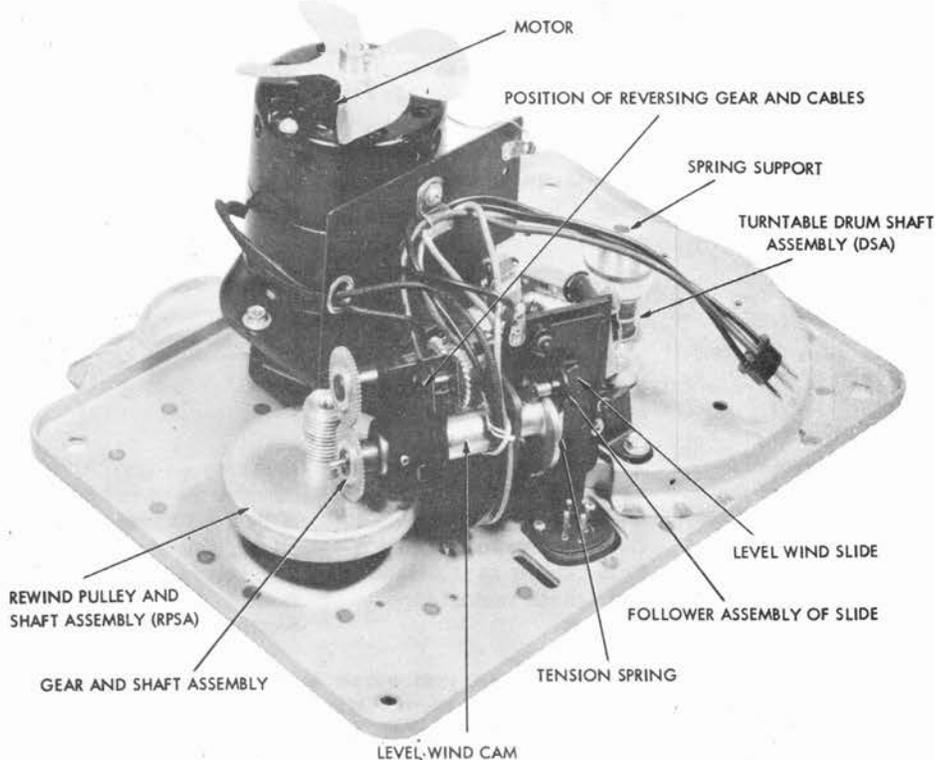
UNDERSIDE WIRE RECORDER ASSEMBLY
